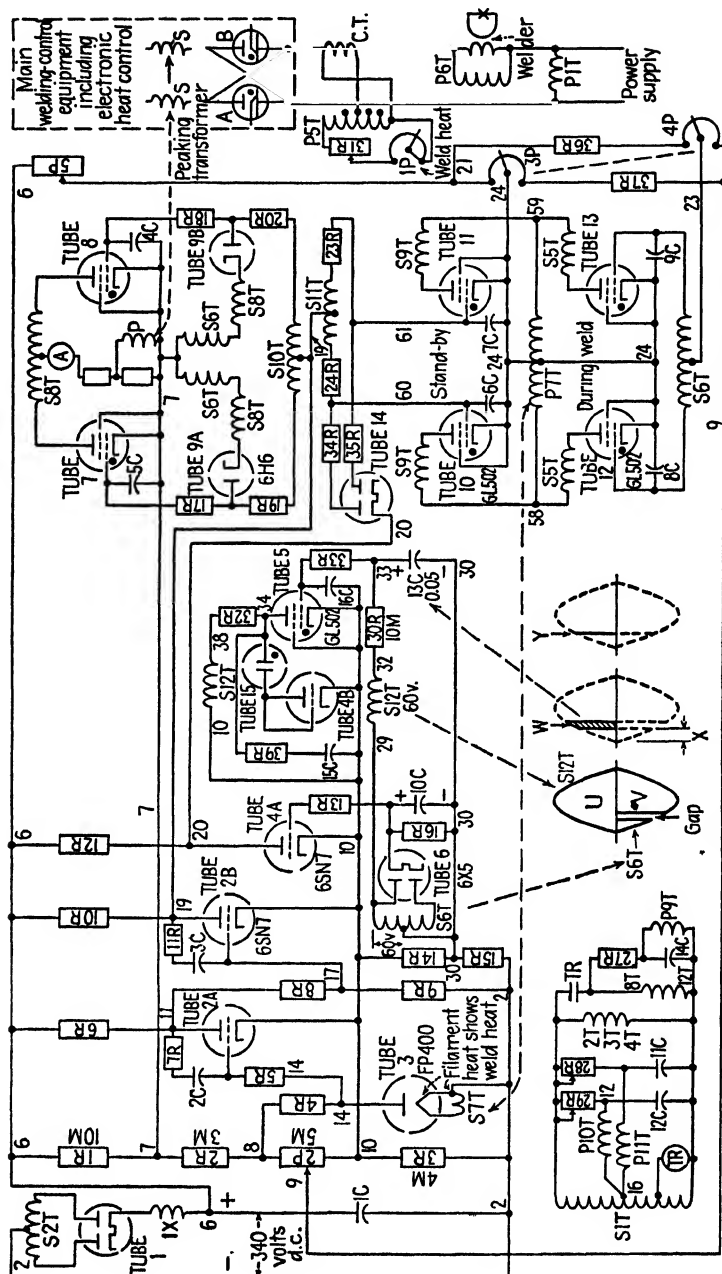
C.—Current-regulating compensator for resistance welding (CR7503-D160).
